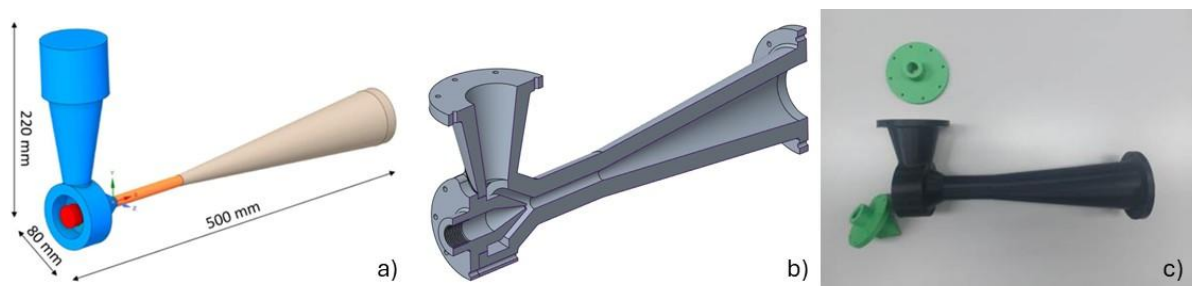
Overall dimensions of the proposed geometry (a), CAD model of the ejector (b), and 3D-printed prototype (c).
